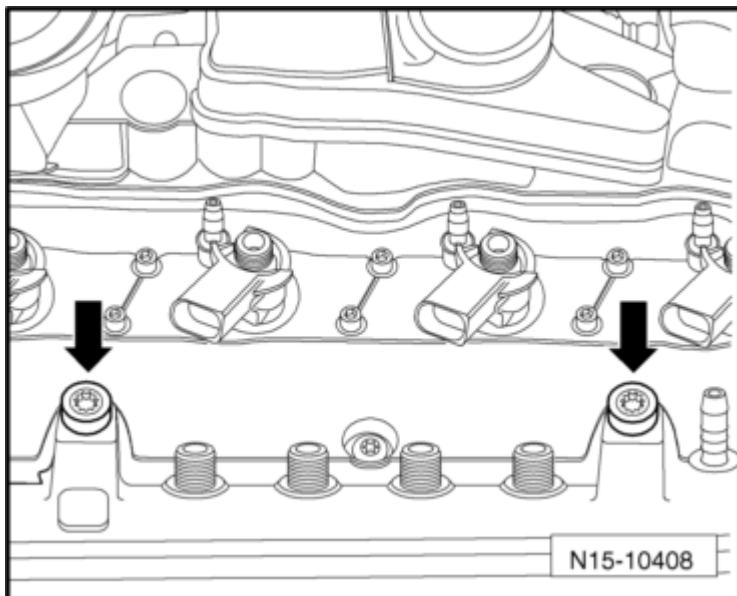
Identifying Bolts -Arrows- And Fuel Rail
